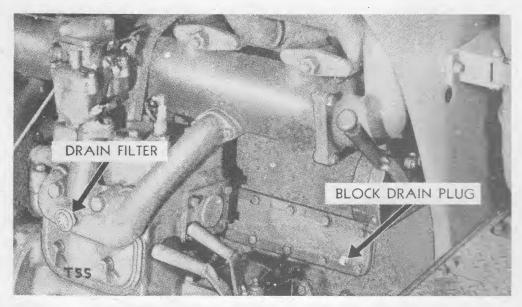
Inlet Manifold Drain Filter, and Block Drain Plug Installed
